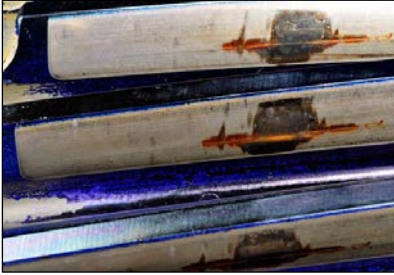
IMS gear set damage. Photo from GEARTECH, NREL 19745.
